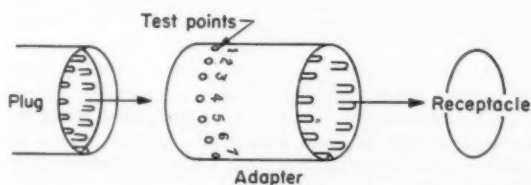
Adapter designed with test points for inserting on a plug that does not have accessible test points.
